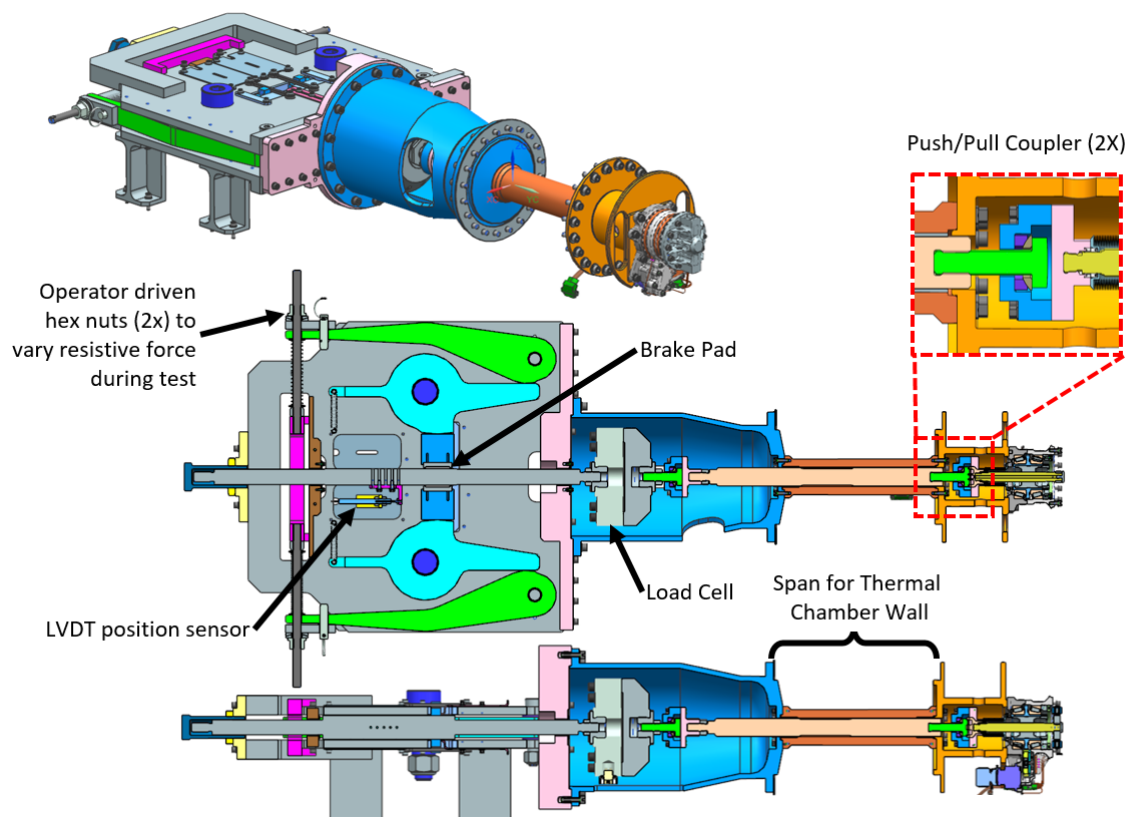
Linear brake equipment used for thermal dyno testing of the Ram Mechanism.
